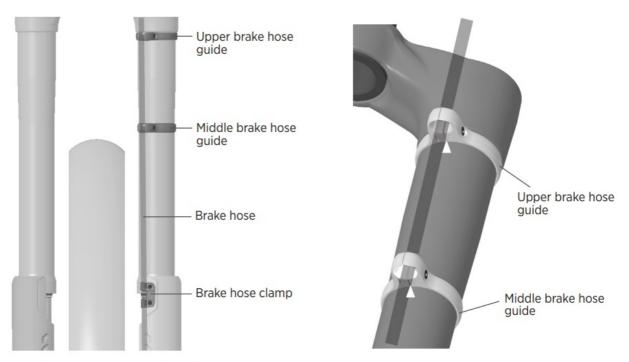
Brake hose routing through brake hose guides and into brake hose clamp
